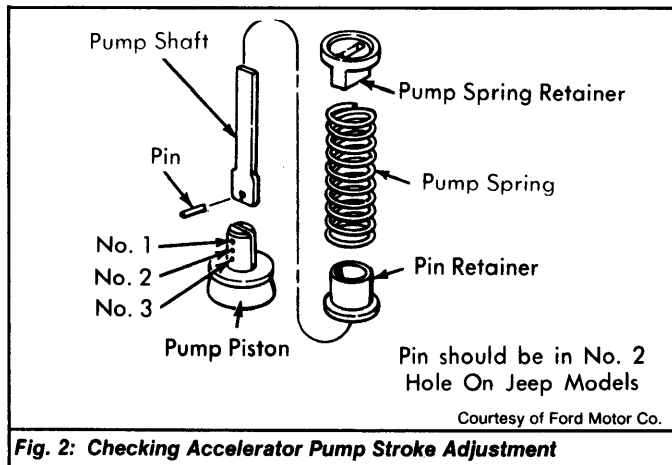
Checking Accelerator Pump Stroke Adjustment
